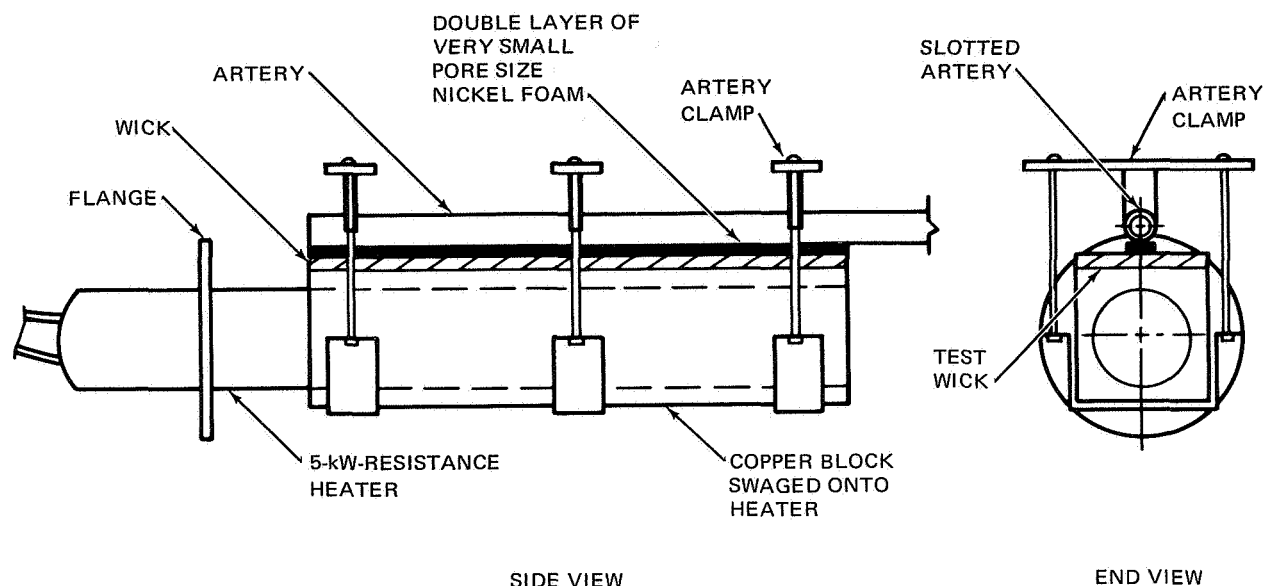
Evaporator Heat Flux Test Device Heater Block, Wick, and Artery Assembly
